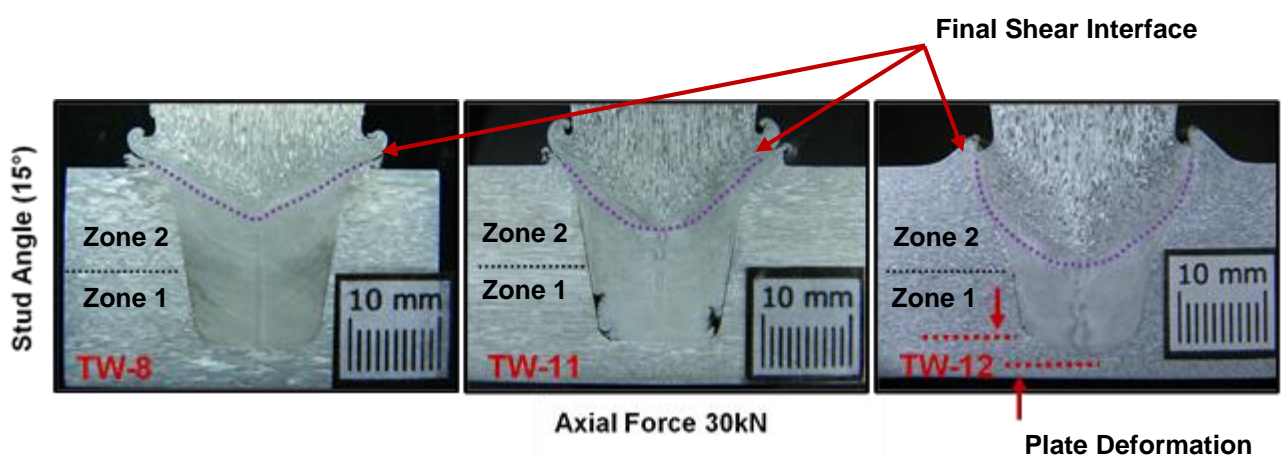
Welds TW-1, TW-11 and TW-12 Macrographs
